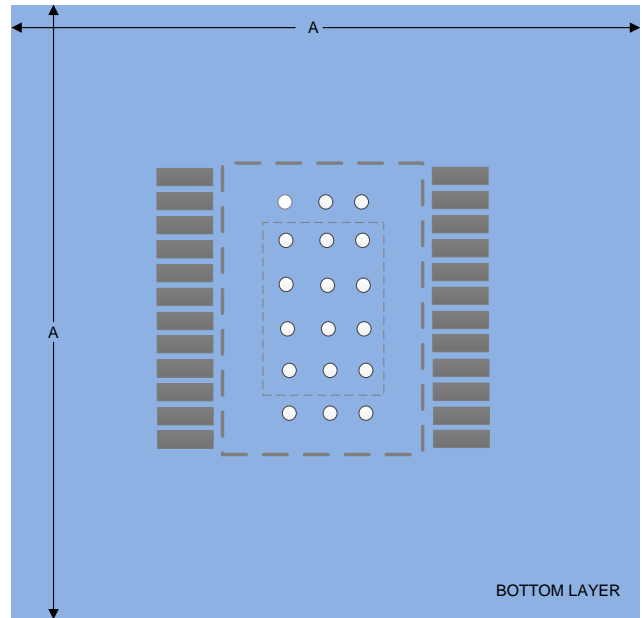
PCB - Bottom Layer (4/2-Layer PCB)
